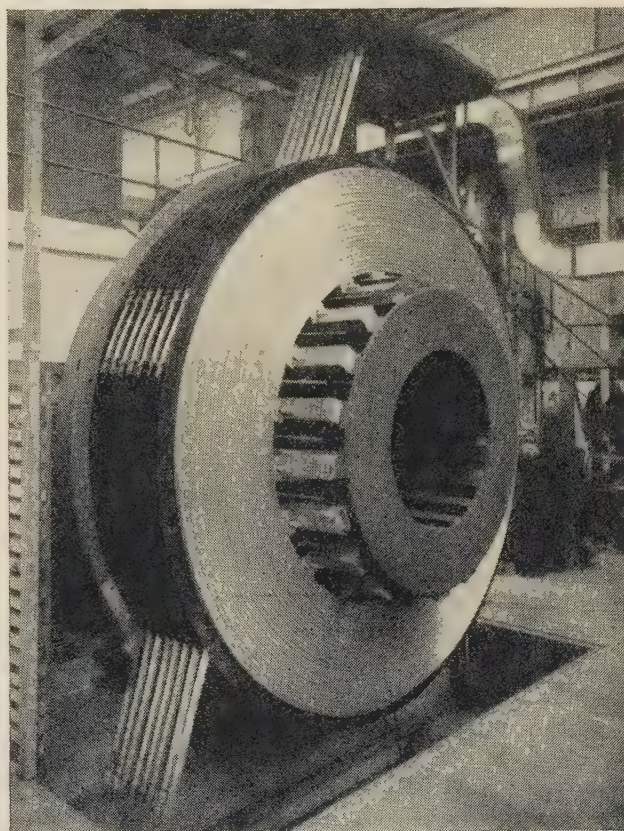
Fig. A.—Almost completed windings for one pole of the magnet on the winding machine.
